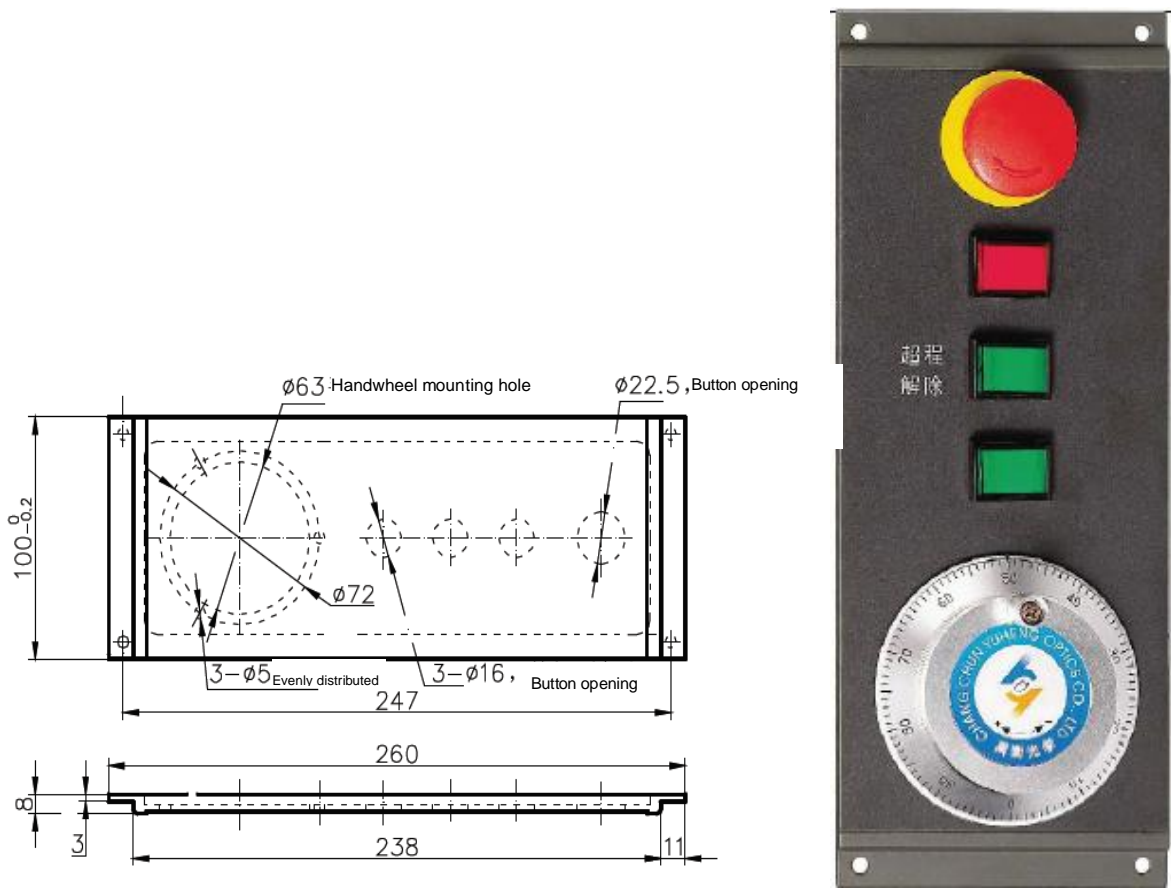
GSK 980TDHi additional panel AP02 and installation dimensions
